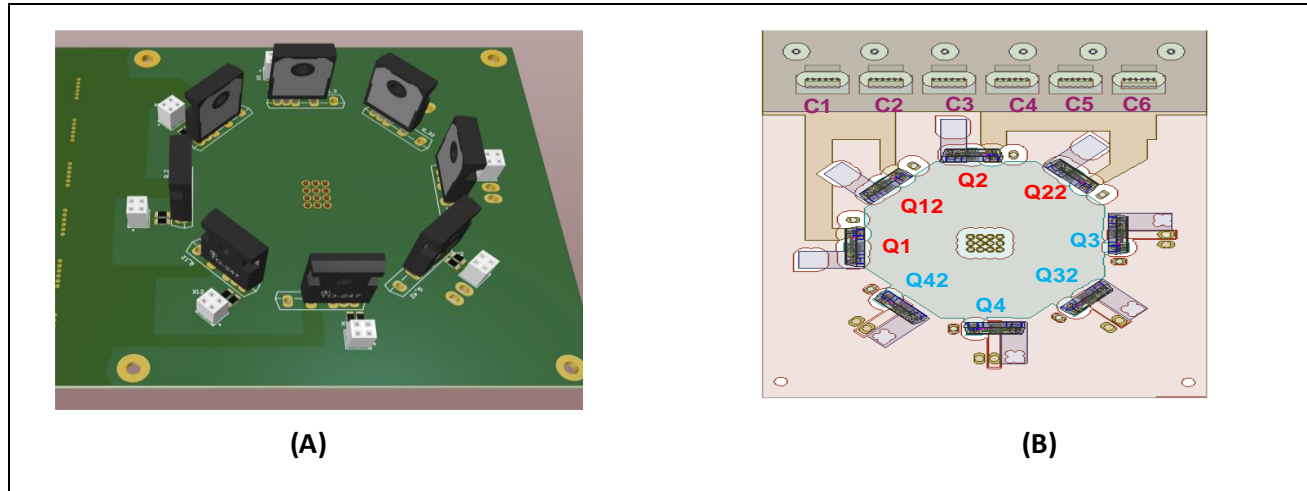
Custom design 2 half-bridge design 4 x parallel (A) 3D view PCB (B) Q3D model
